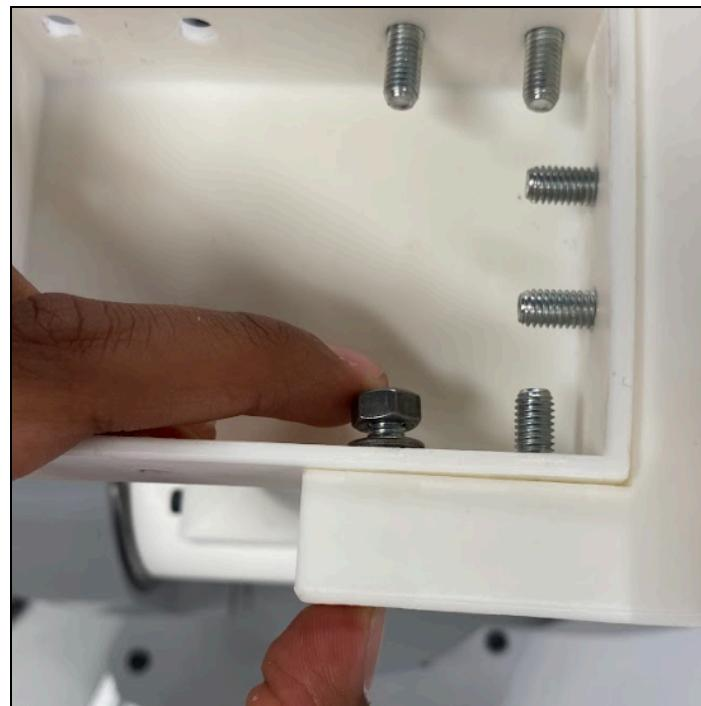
J3 Bearing Holder to Bicep Fastener orientation
